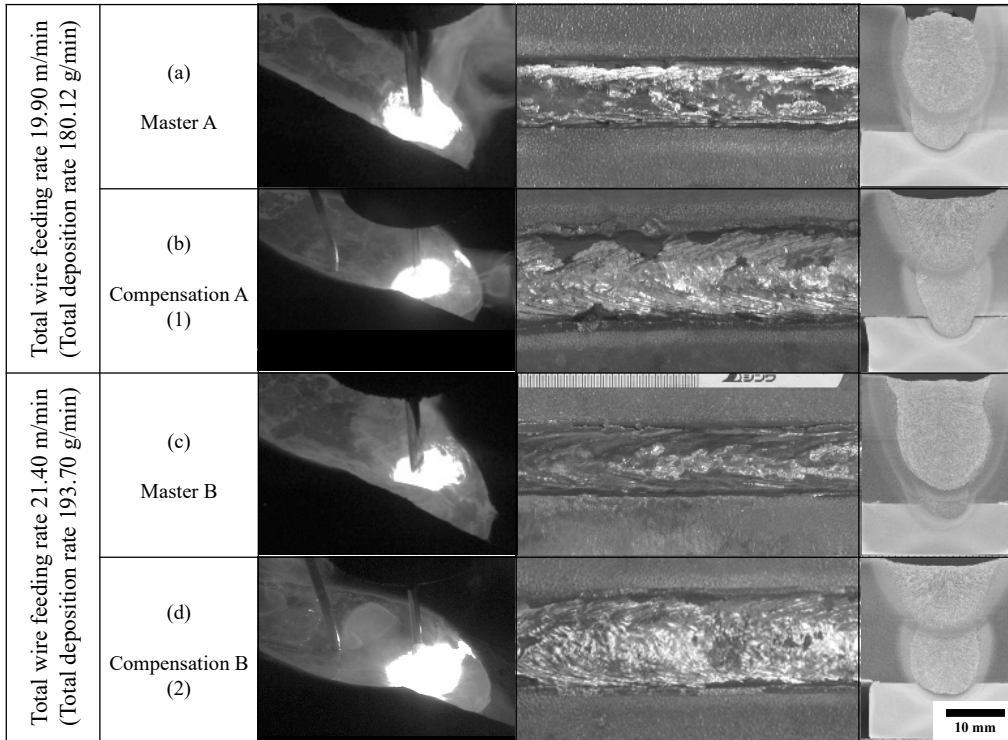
Captured arc observation, bead appearances, and macro cross-sectional of the welds (a) Master A (b) Compensate A (c) Master B and (d) Compensate B
